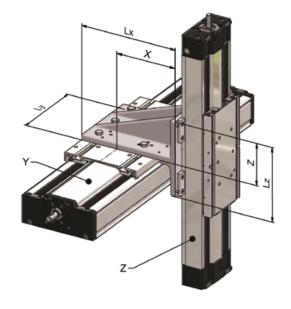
Angle connection Y – Z – Axis – System, profile assembly
